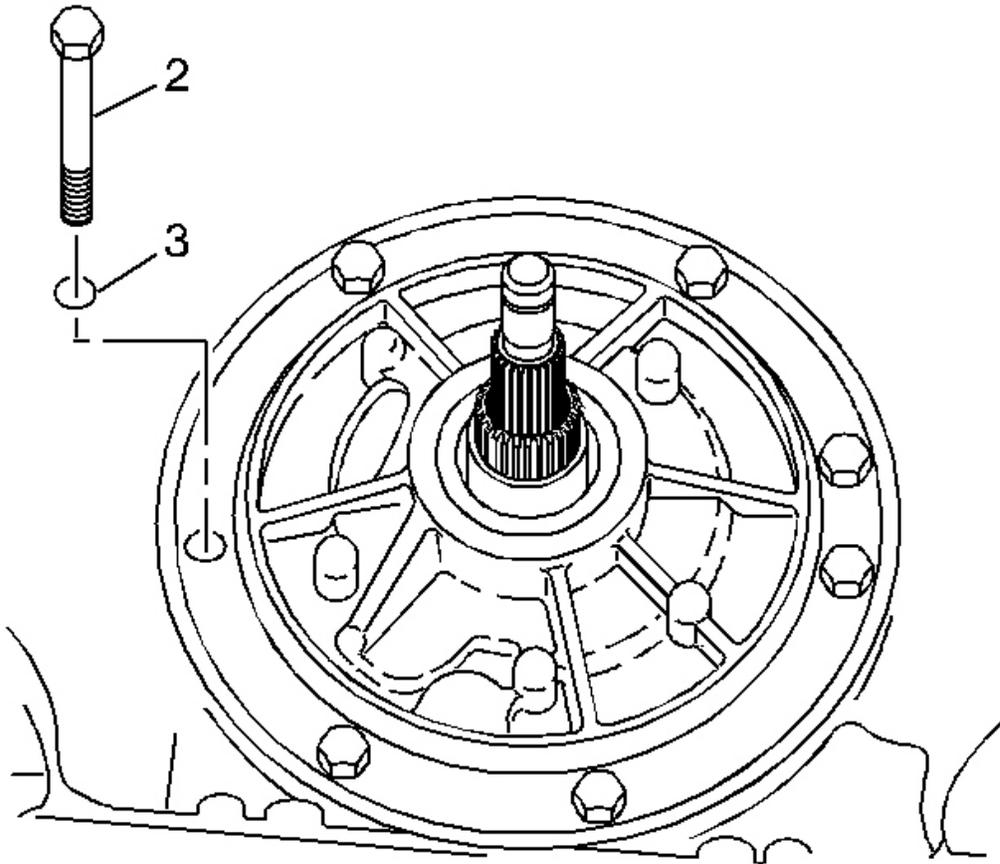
Install Remaining Pump To Case Bolts & O-Ring Seals
